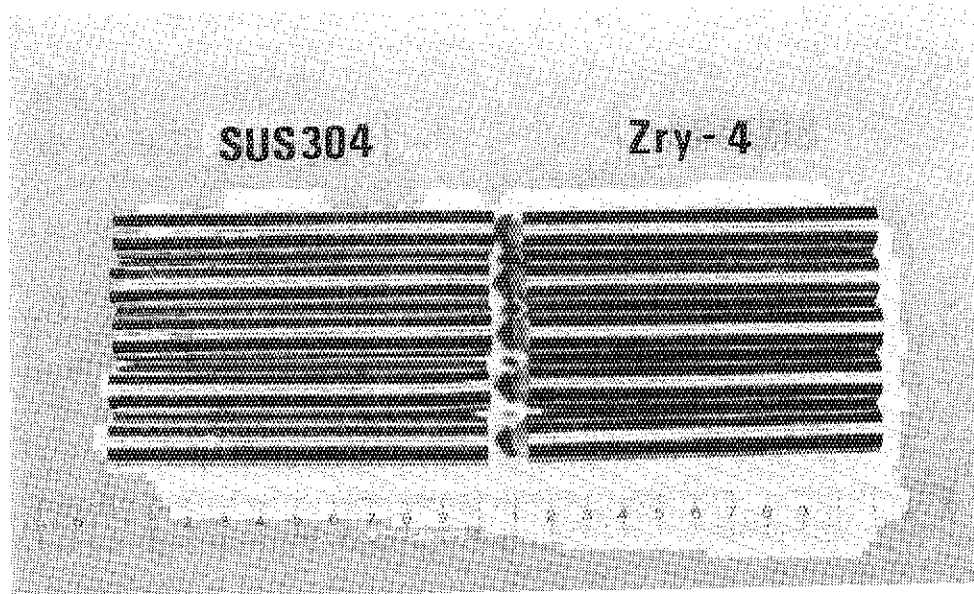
Specimen of the 45°-tapered eutectic joint for bend test (E1-E5)
